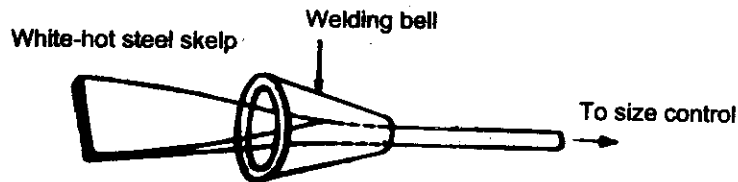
Welding bell process for pipe manufacturing
